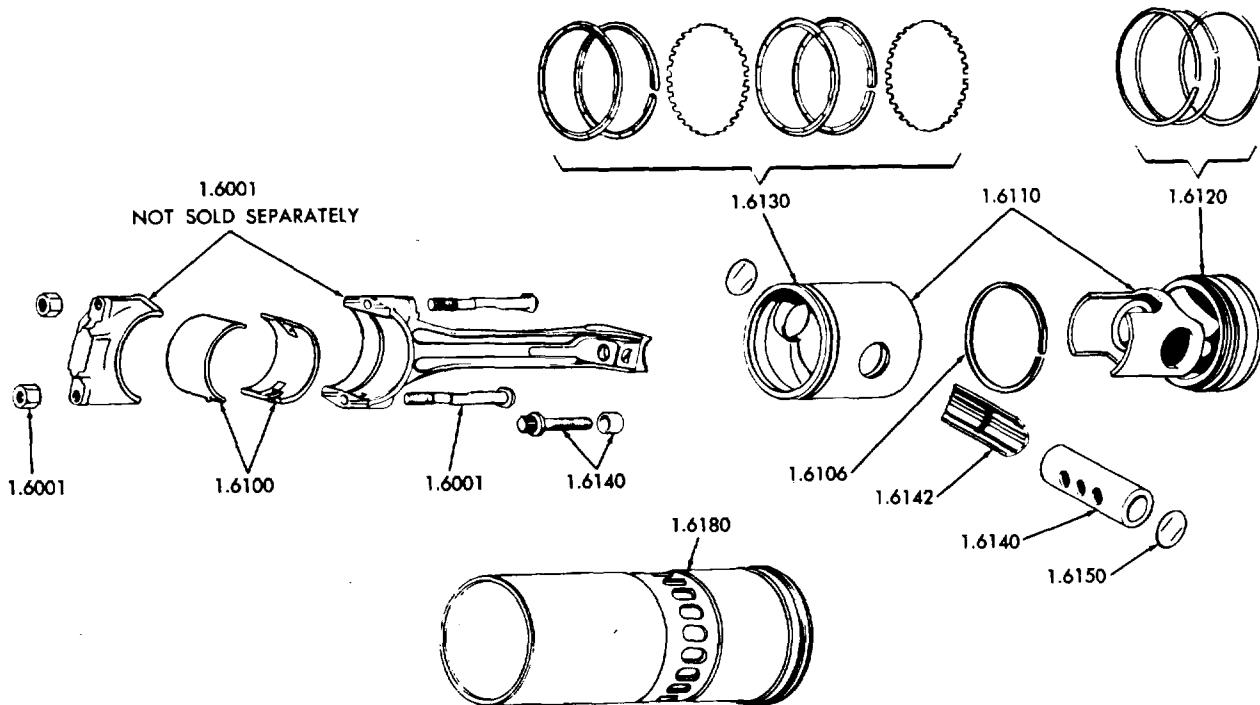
C. CONNECTING ROD AND PISTON (CROSSHEAD)
